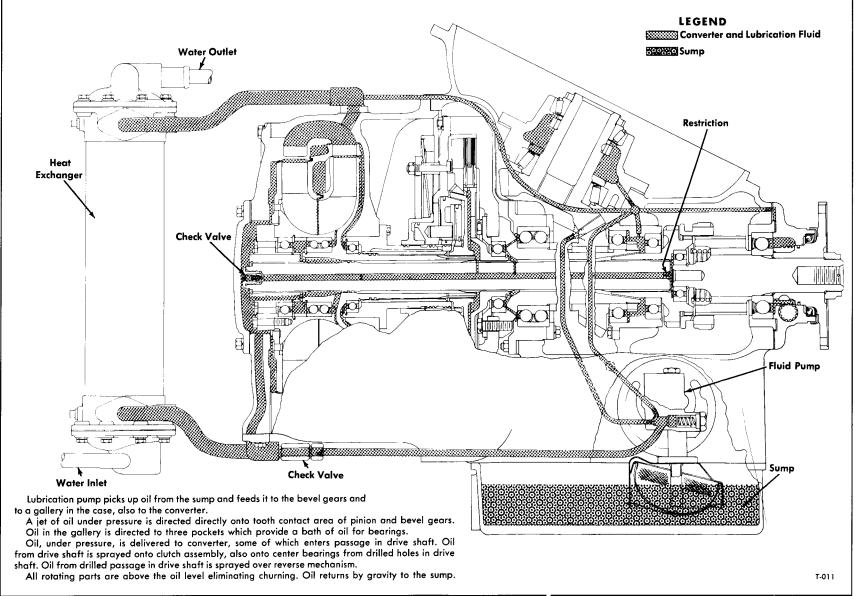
Sectional View of GM Hydraulic Drive—Model VH
